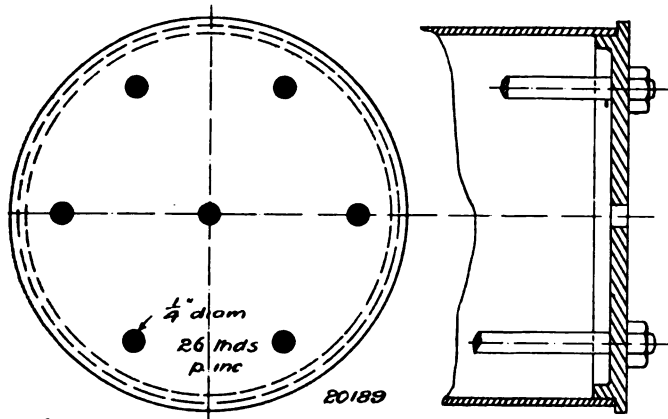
SECURING BOILER ENDS BY BOLTS ONLY.
